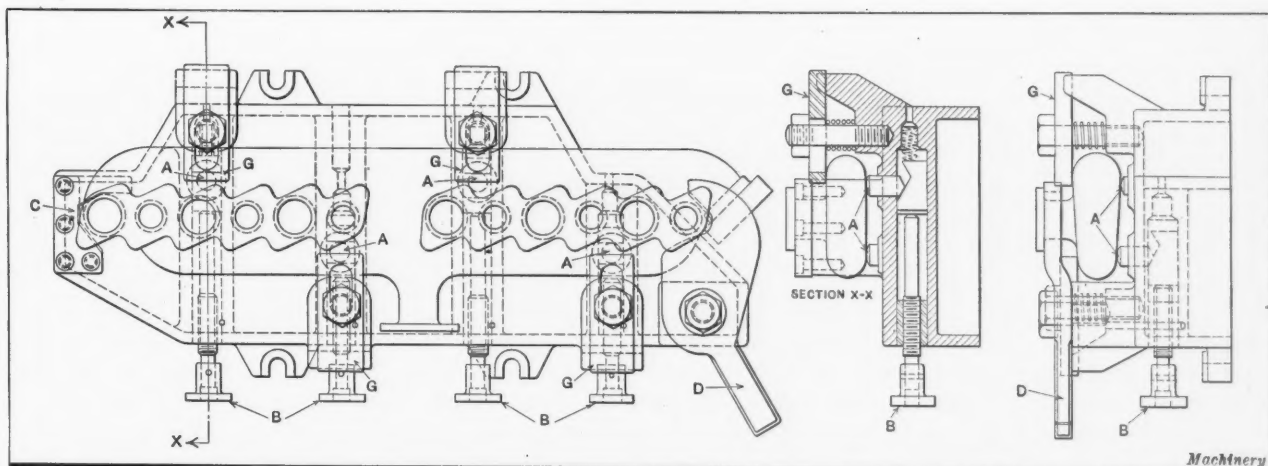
Plan and Cross-sectional Views and End Elevation of One of the Milling Fixtures shown on the Machine illustrated in Fig. 4
